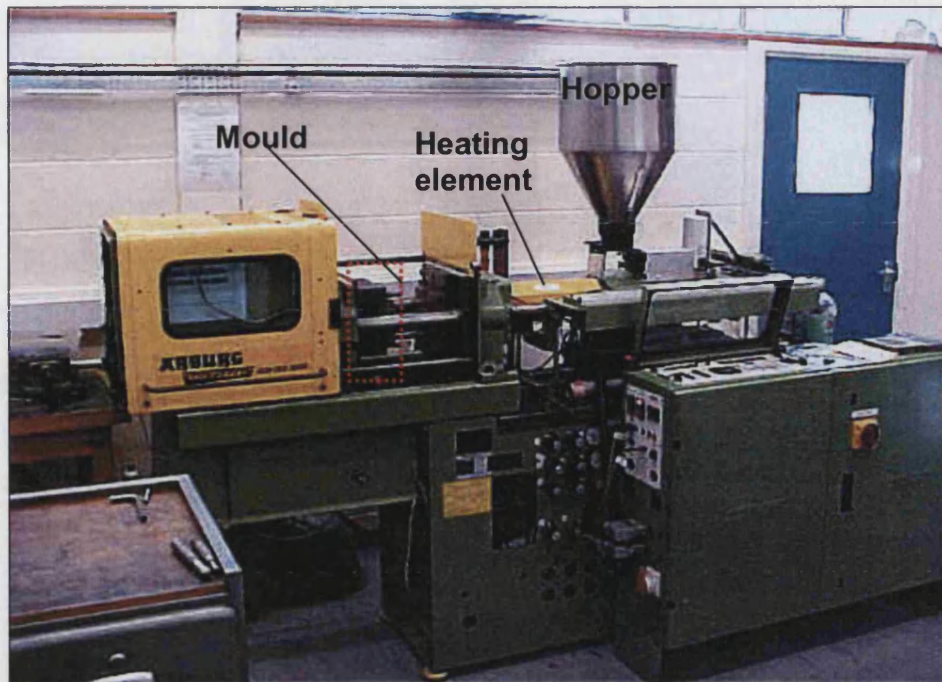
Arburg injection moulding machine complete with master mould attached (red box) and hopper.
